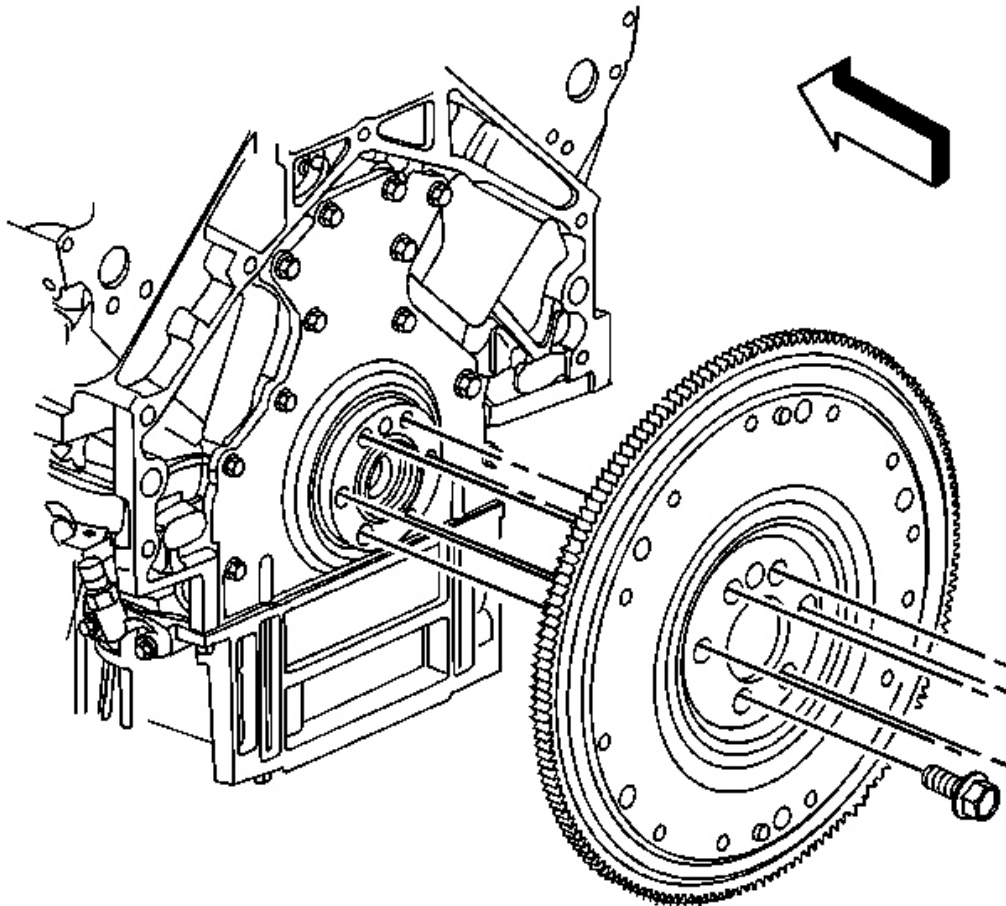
Manual Transmission Engine Flywheel & Bolts
